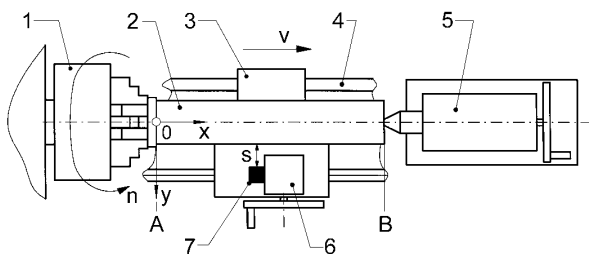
The optical sensor placed on the machine-tool (lathe): 1- chuck with 3 jaws; 2- workpiece; 3- cross-slide rest; 4- table slides; 5- tailstock; 6- tool head; 7- optical transducer
